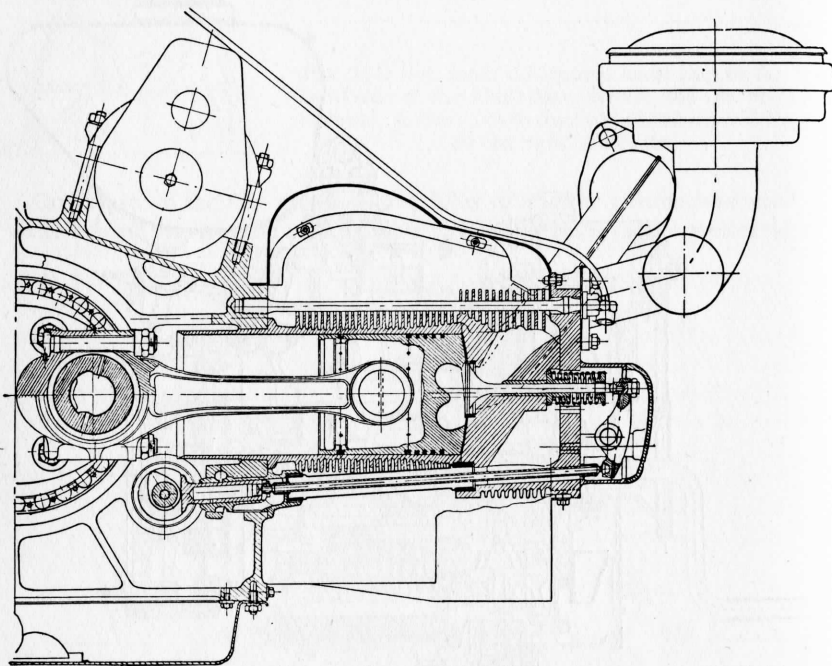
Transverse section of the flat six-cylinder Tatra 116 engine.
